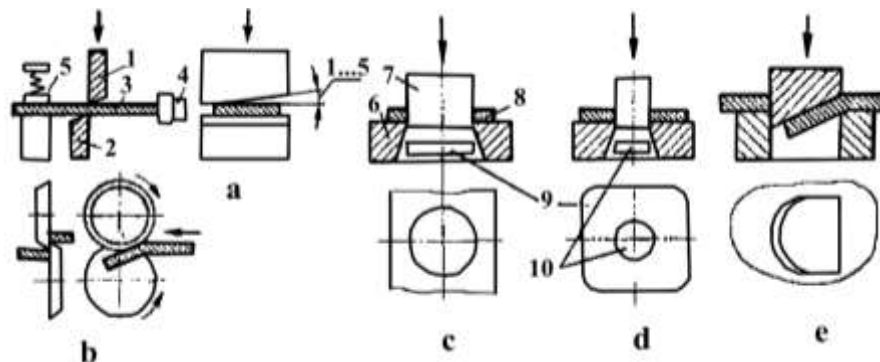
Separating operations of sheet stamping: a-cutting by guillotine shears; b-cutting by circle shears; c-blanking; d-piercing; e-notching; 1 – upper knife; 2 – lower knife; 3, 8 – billet; 4 – size restrict; 5 – fixer; 6 – lower die; 7 – upper die; 9 – part (stamping); 10 – waste
